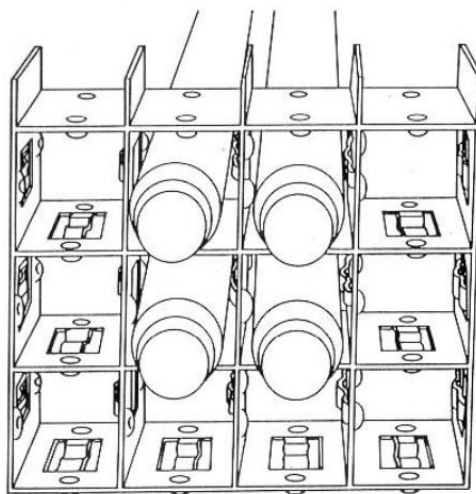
Spacer grid section of a PWR fuel assembly. Example of how fuel rod supports look like. [4]
